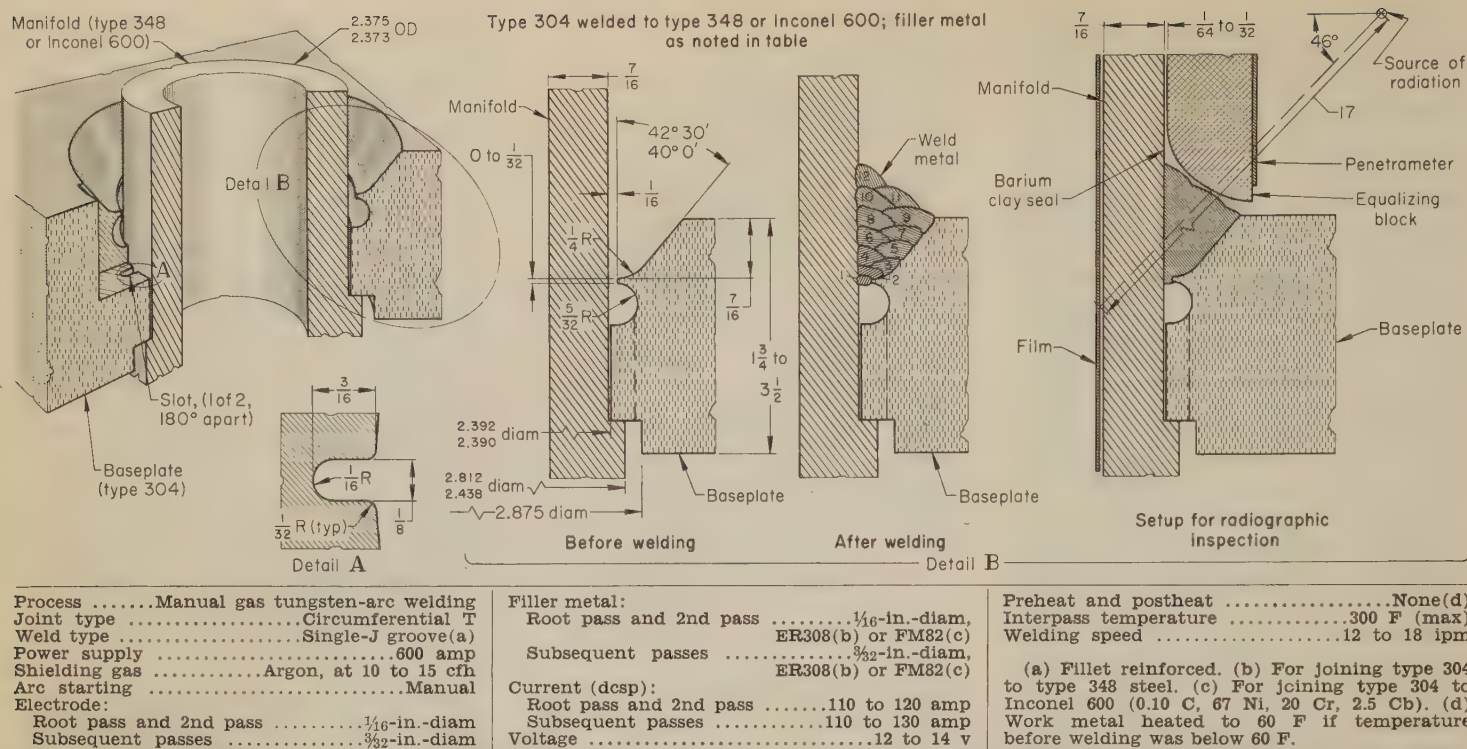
Joint design, weld pass sequence and setup for radiographic inspection of finished weld of manifold and baseplate assembly for a nuclear application (Example 270)
